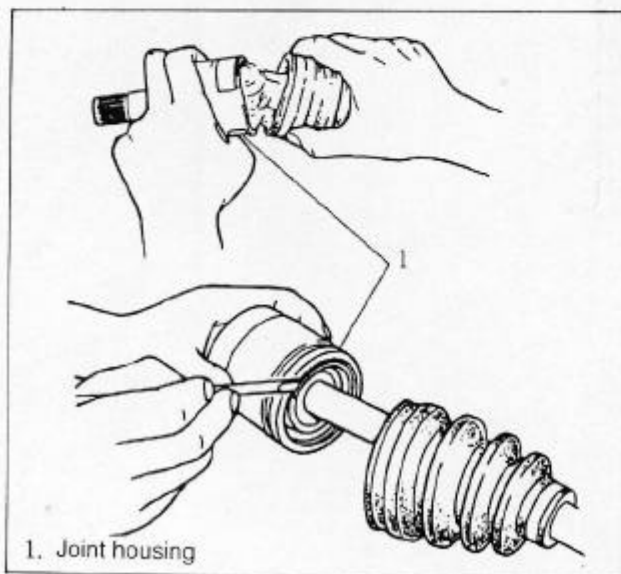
3 DISASSEMBLING JOINT HOUSING
